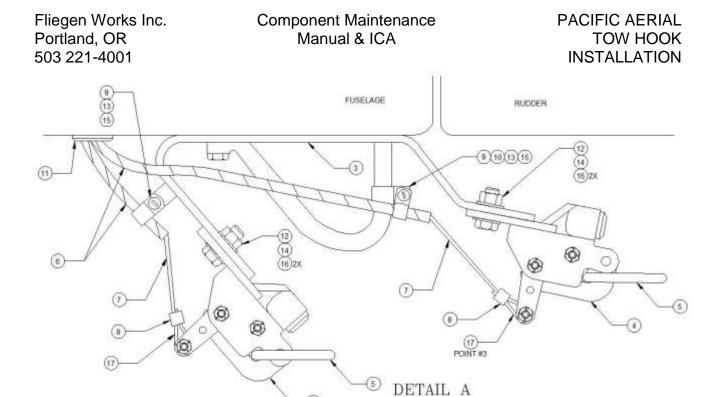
PATH Dual tow Hook Install for Piper PA-22 & Colt-108, Detail A
